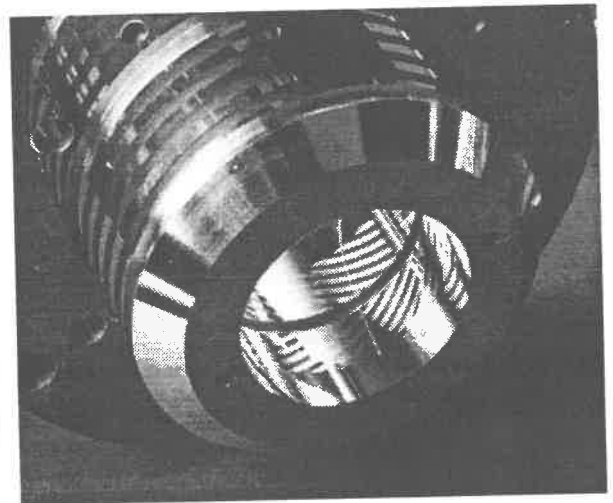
Spiral Groove Structure of the Axial Bearing (depth: 5 μm)
